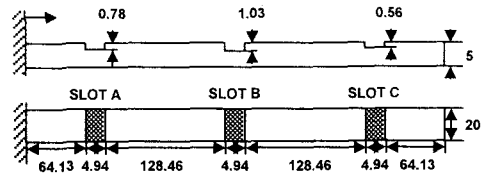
Geometry of a cantilevered beam specimen with three slots (units: mm)
